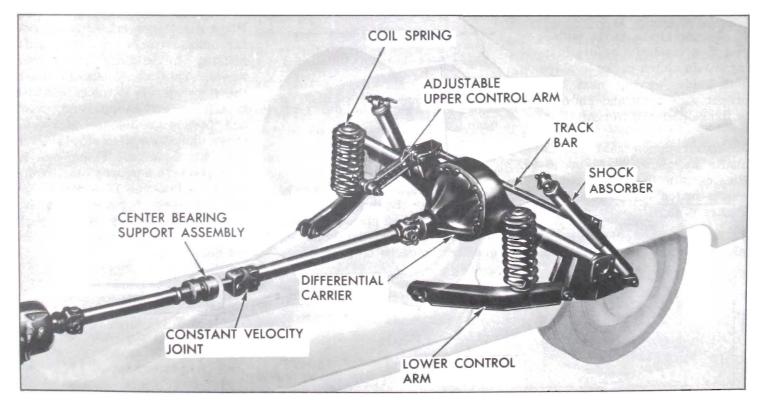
Propeller Shaft and Rear Axle Assemblies-4400-4600-4800 Series
